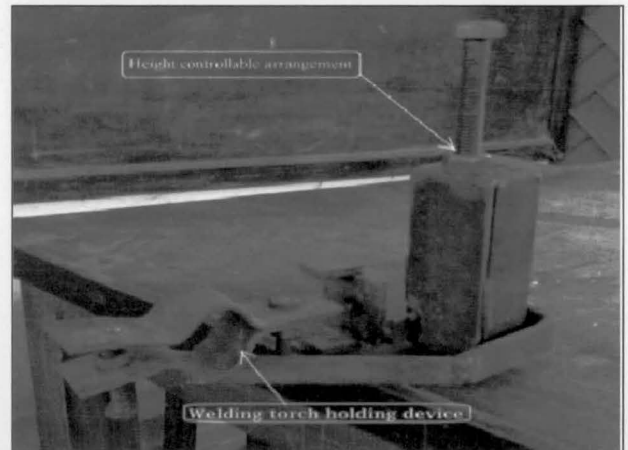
Photograph of welding torch holding device with electrode work piece gap controllable arrangement.
